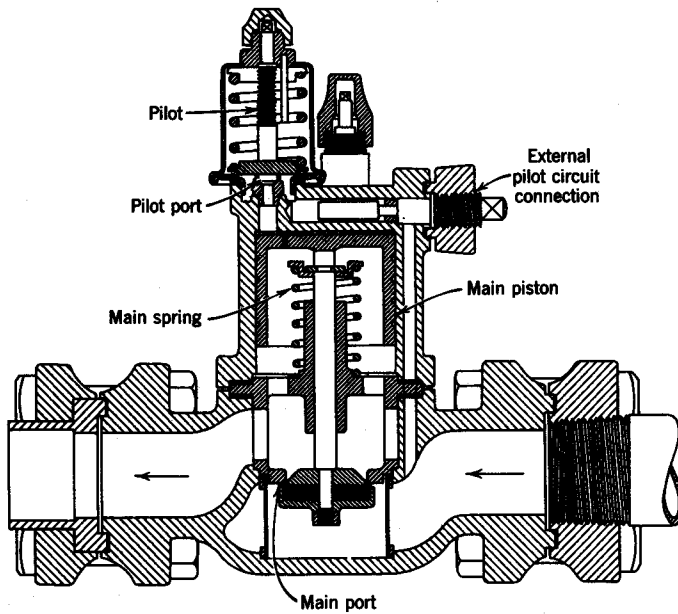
Pilot-operated evaporator pressure regulator. (Courtesy Alco Valve Company.)
